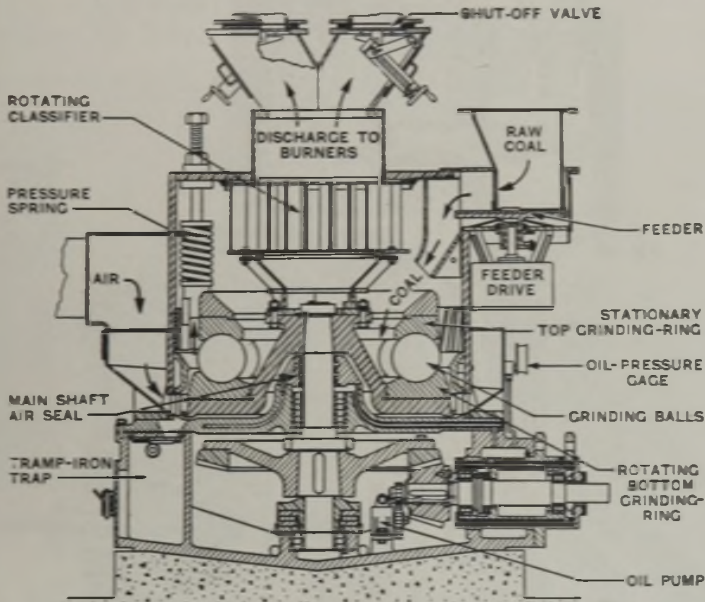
Cross-section of Babcock and Wilcox Type E pulverizer.
